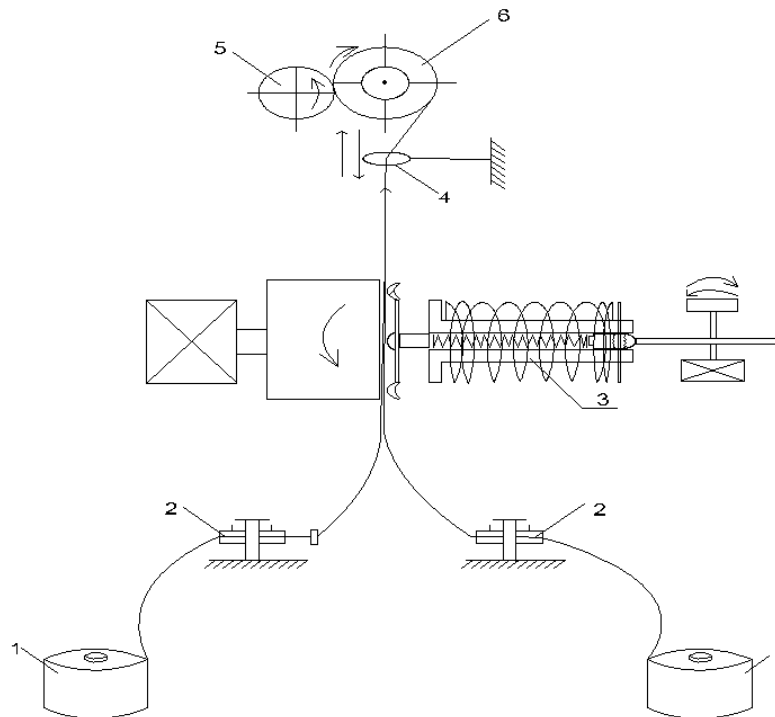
Technological scheme of the TW2-D machine for doubling (rewinding) two single threads, manufactured by the Swiss company “SSM.”
